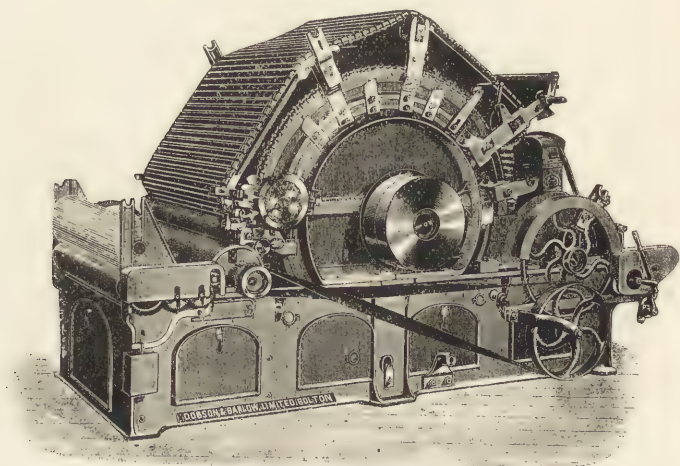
A REVOLVING FLAT CARDING ENGINE.
